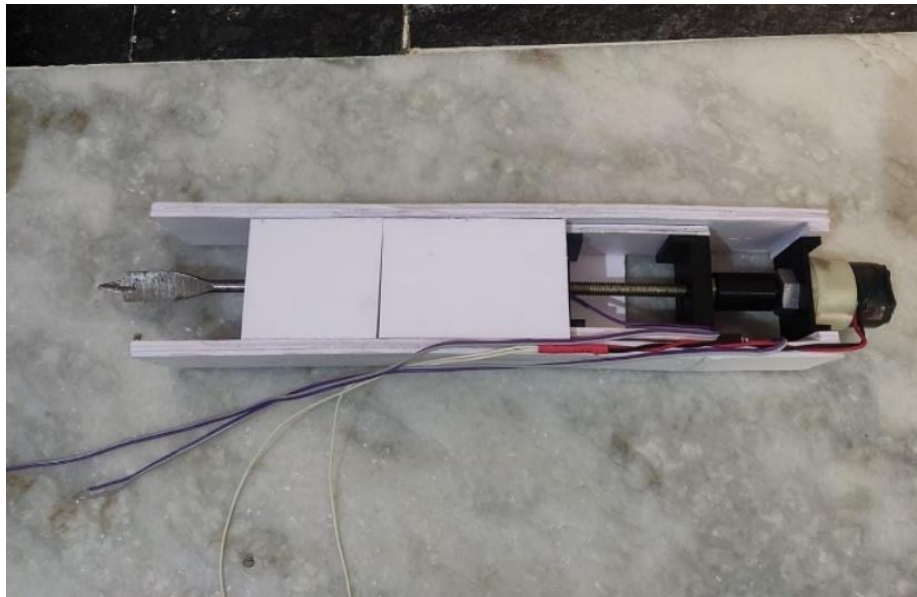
Fabrication of Drill Bit Assembly
